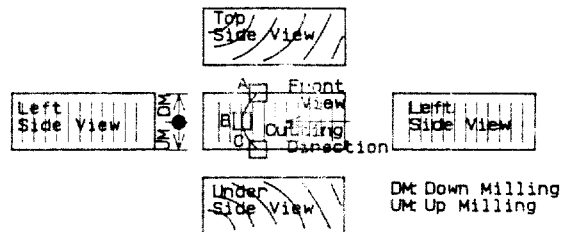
Burr Produced in Face Milling toward Diagonal line of fiber direction.
